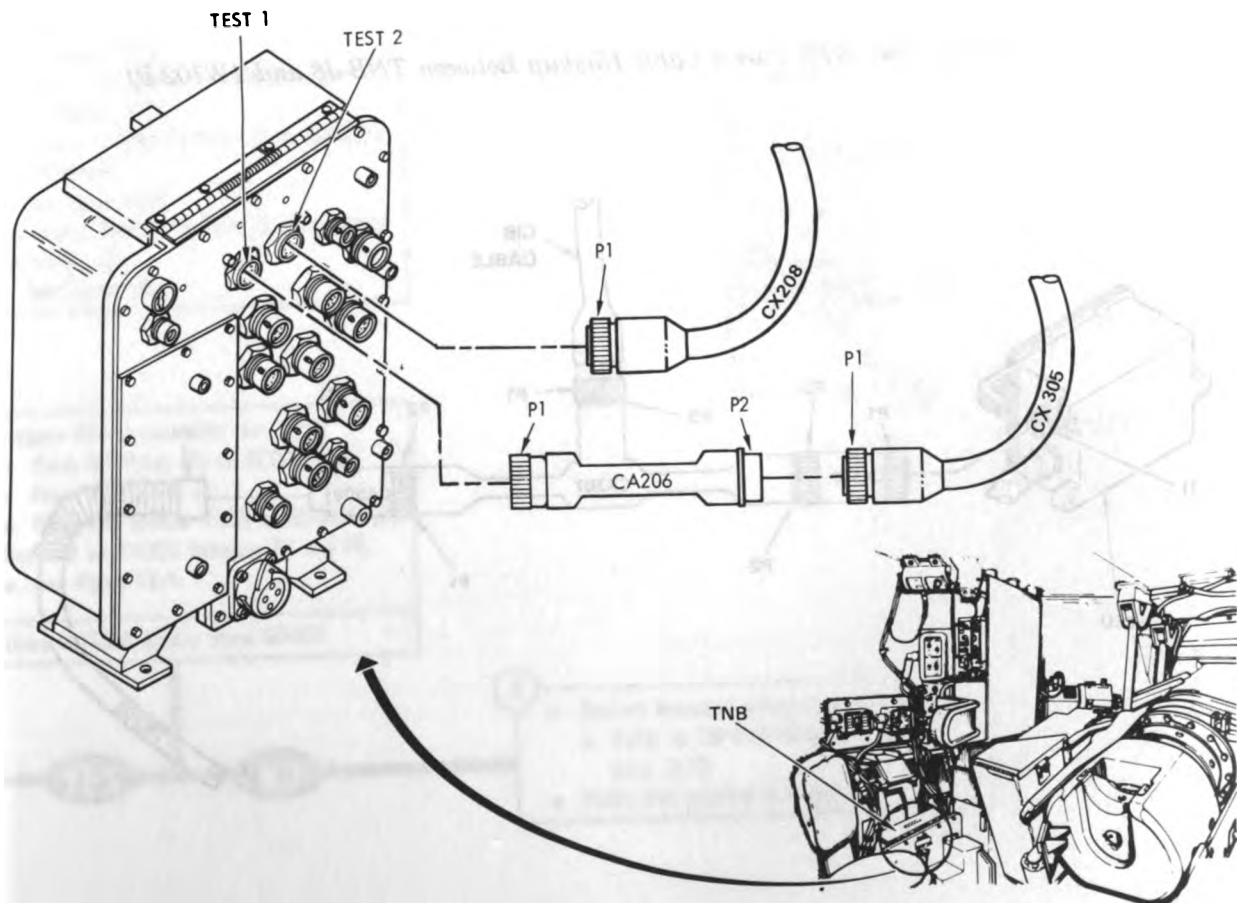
STE Turret Cable Hookup to TNB TEST 1 and TEST 2
